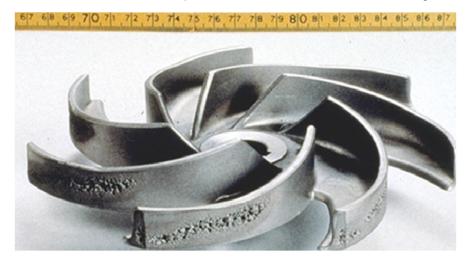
48. Cavitation of Stainless Steel Pump Impeller in Vacuum Evaporation System for Evaporated Milk - Cavitation Damage on Discharge Side of Impeller
